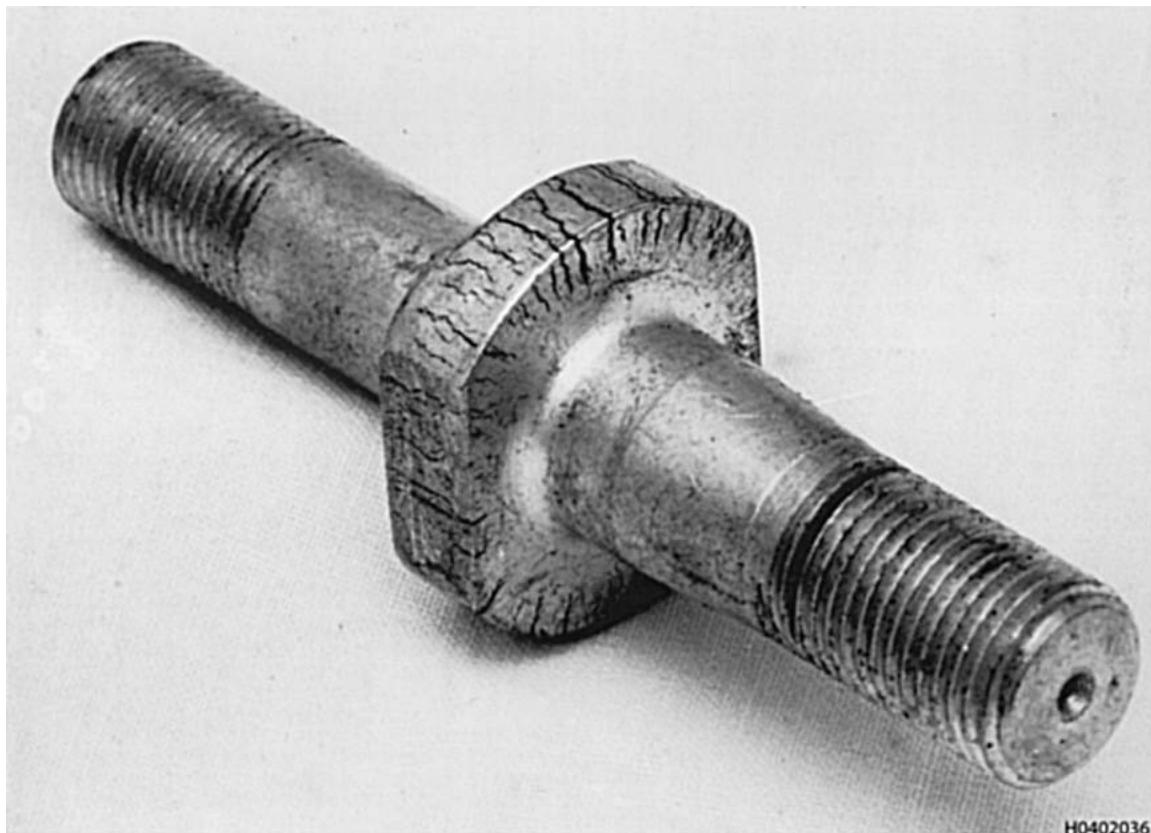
Magnetic Particle Indications of Forging Cracks or Bursts in an Upset Section, Severe Case
